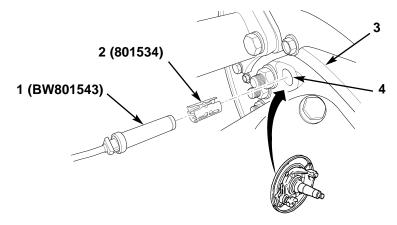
Installing Clamp Sleeve and Wheel Sensor.
